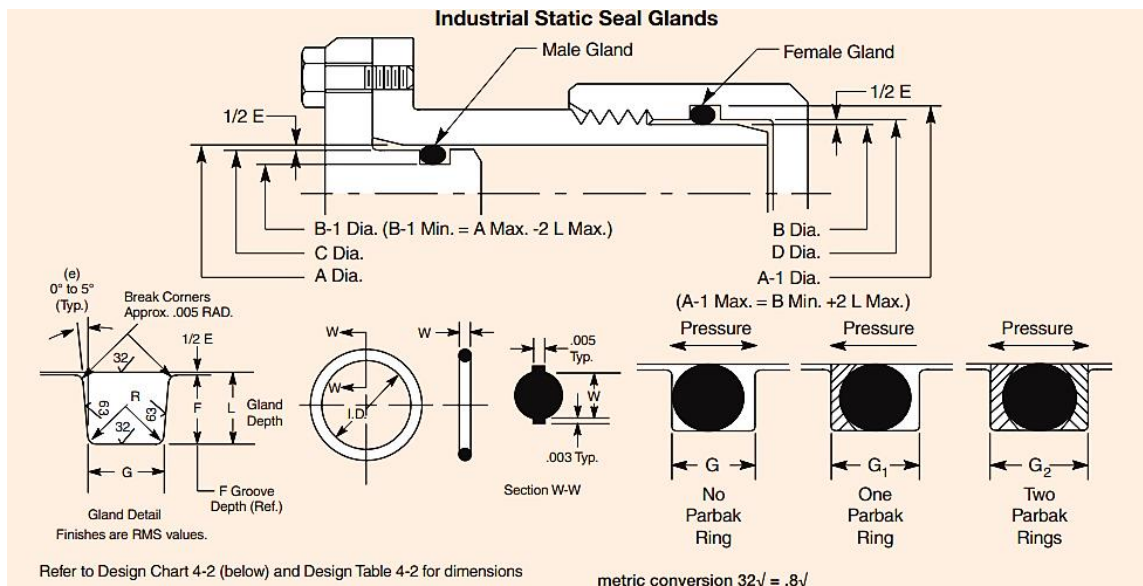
Industrial static seal glands from the *Parker O-ring Handbook
